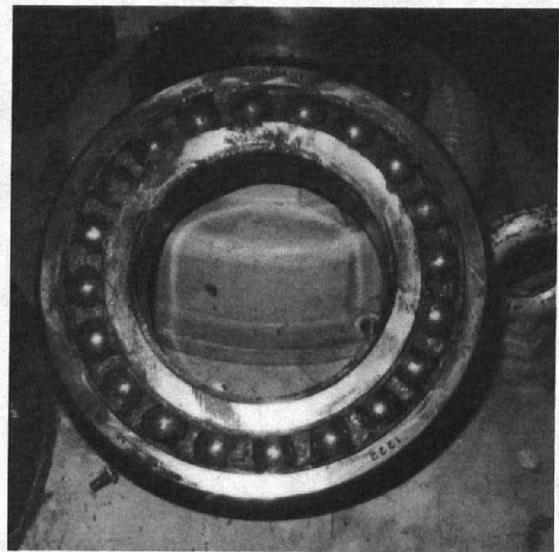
Dynamometer upper trunnion bearing following removal from the dynamometer.
